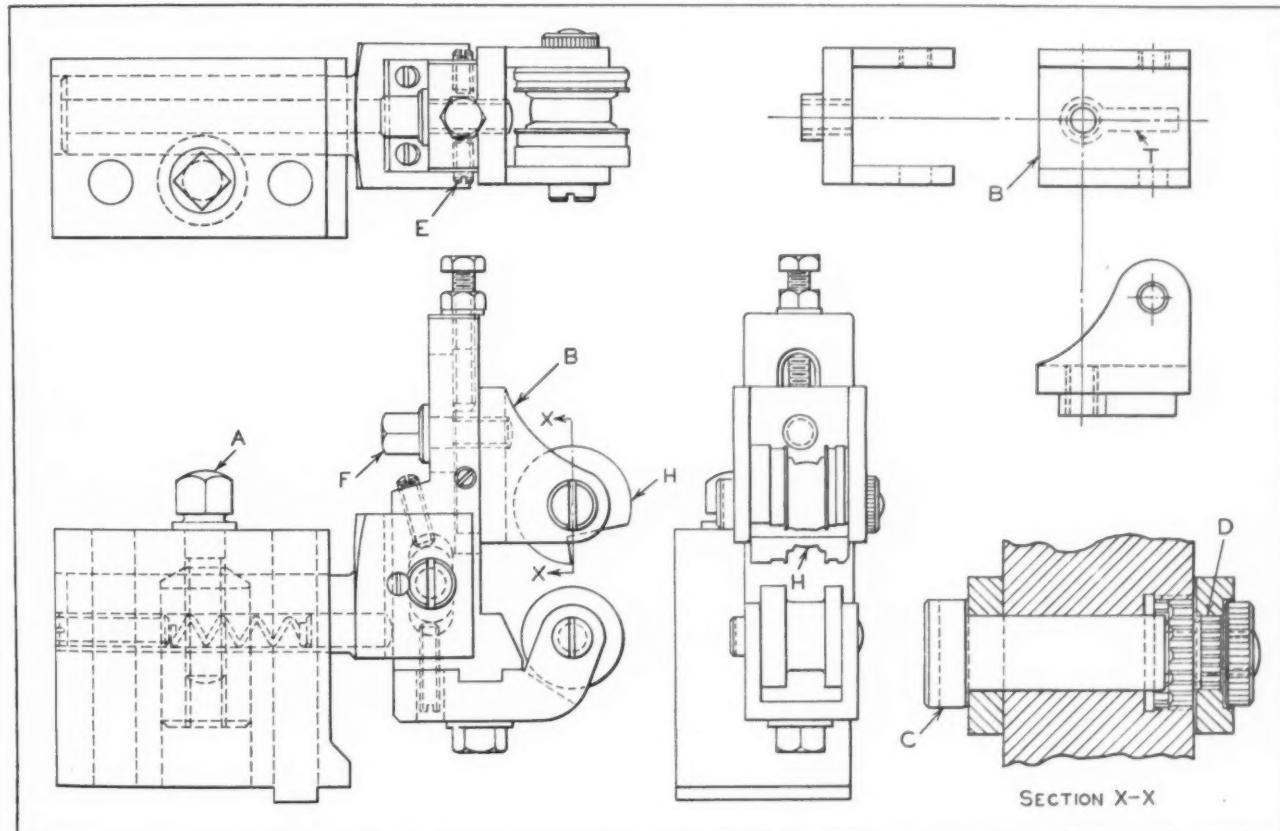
Circular Shaving Tool and Holder for Screw Machine
